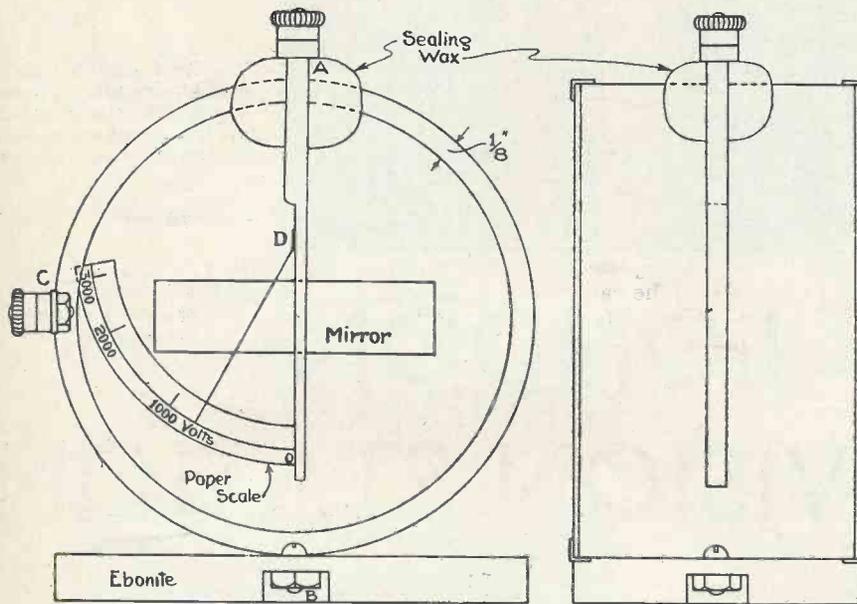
Front and side elevations of the electrostatic voltmeter showing details of construction.
